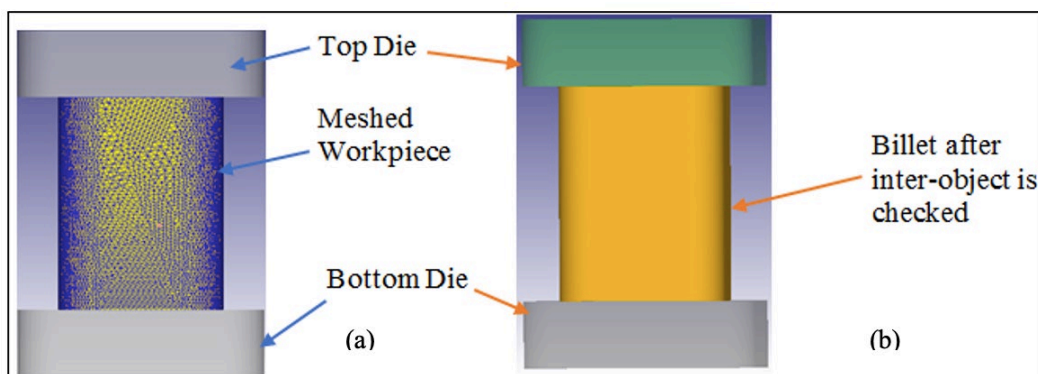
a) Open die forging model with meshed billet; b) Billet position between top and bottom dies
